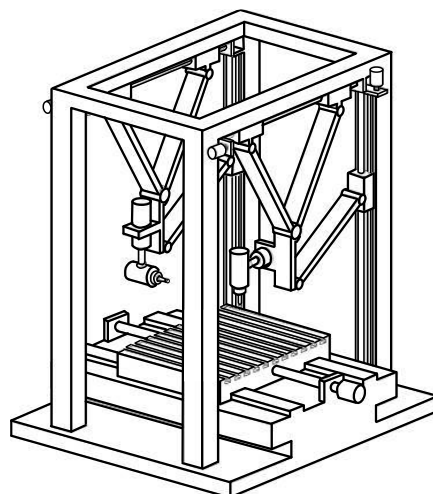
Double spindle mill-drilling machine layout with rotation module of the spindle on movable platform / Двошпindelьна компоновка свердильно-фрезерного верстату з модулем повороту шпинделя на рухомій платформі
